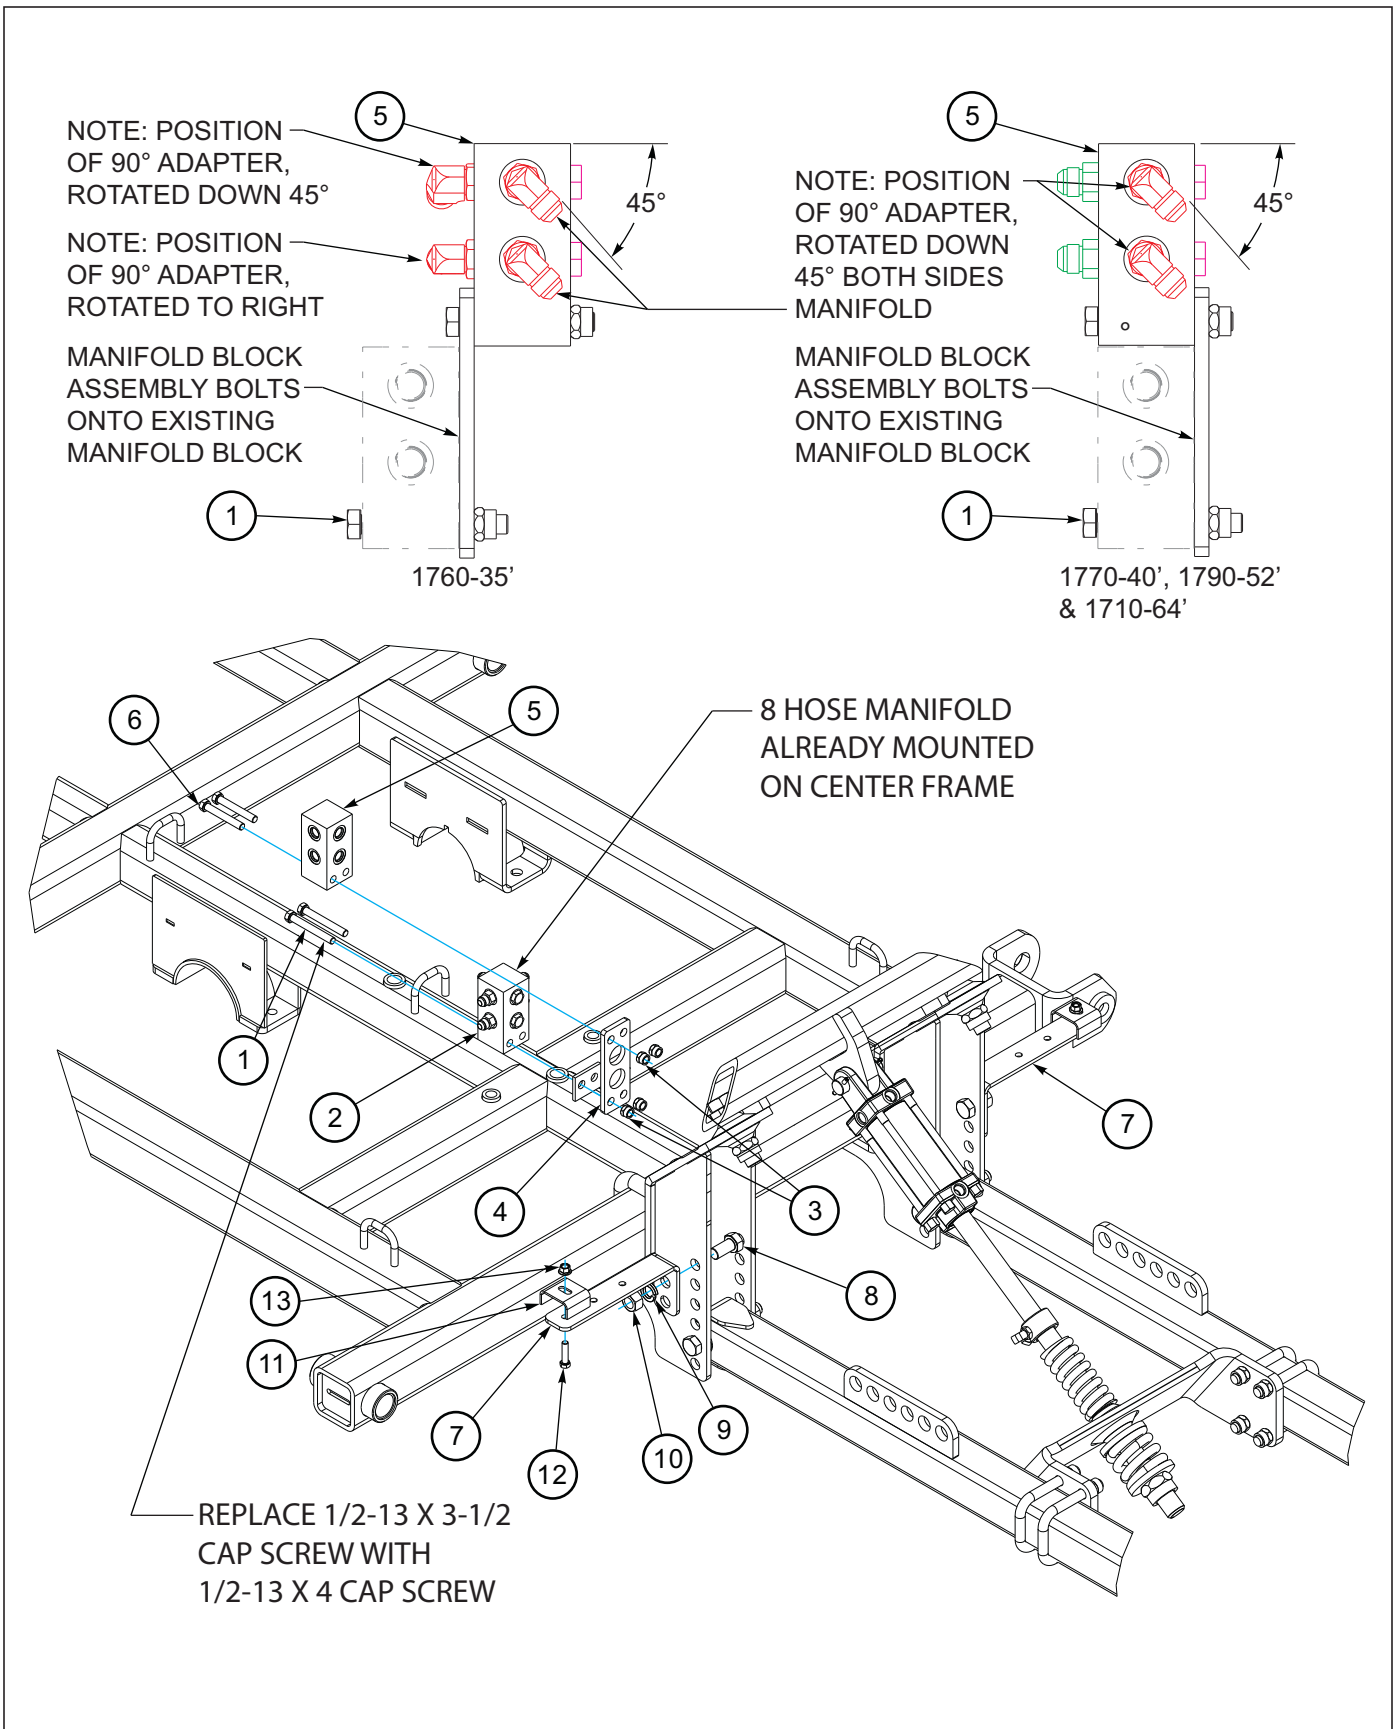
Hydraulic Manifold & Hose Mount Treader Assembly Hydraulic
